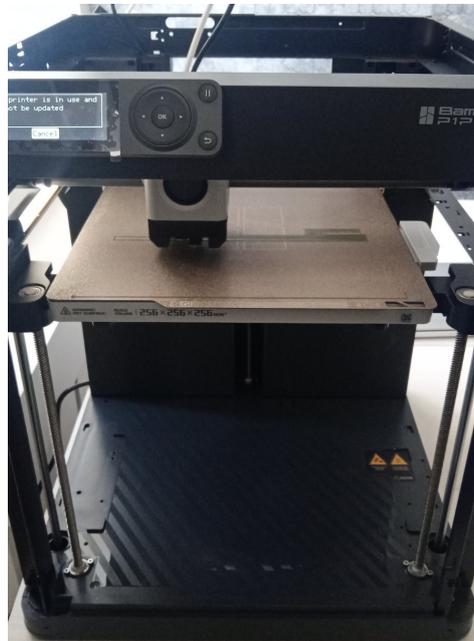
Housing manufacturing process using P1P with PETg LBL plastic
